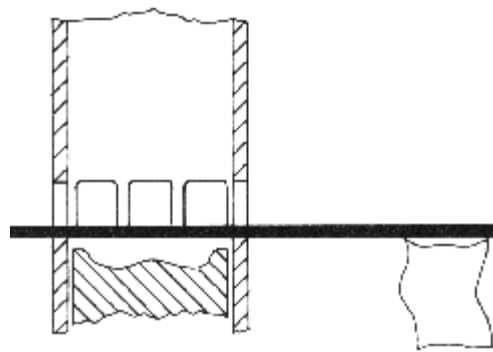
"Stop-Bar" Inserted Through Cylinder Ports
